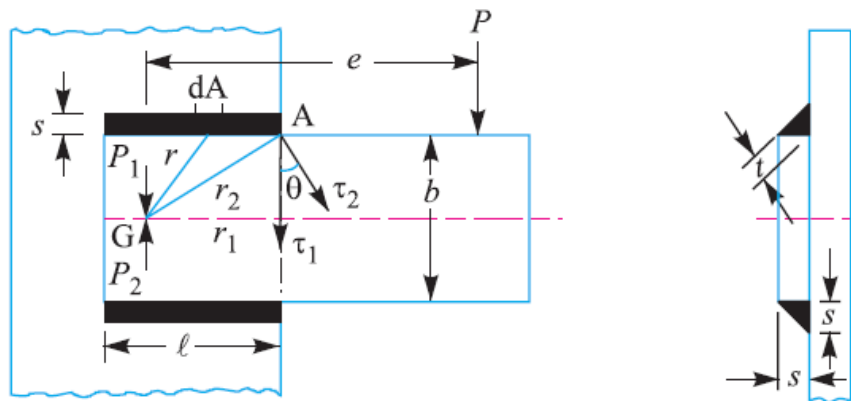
Eccentrically loaded welded joint.
